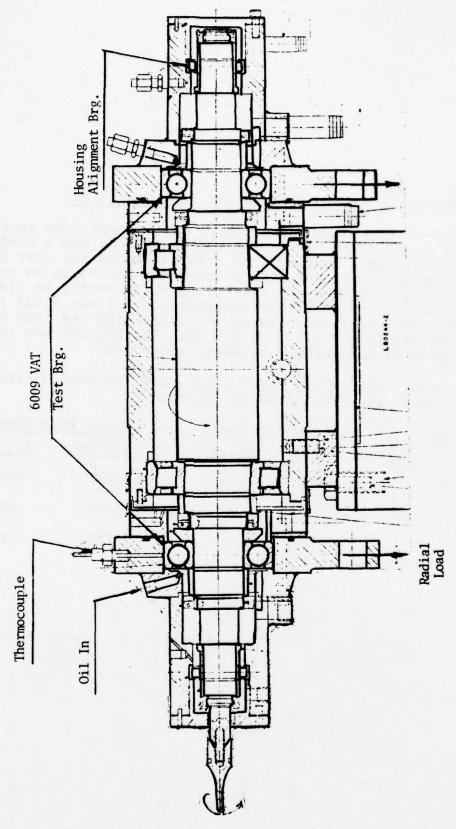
SKF Endurance Test Machine Details of Test Hardware For Deep Groove Ball Bearings
